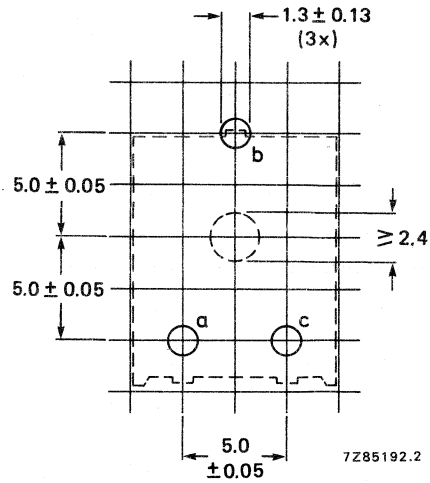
Hole pattern for horizontal versions, viewed from component side.
